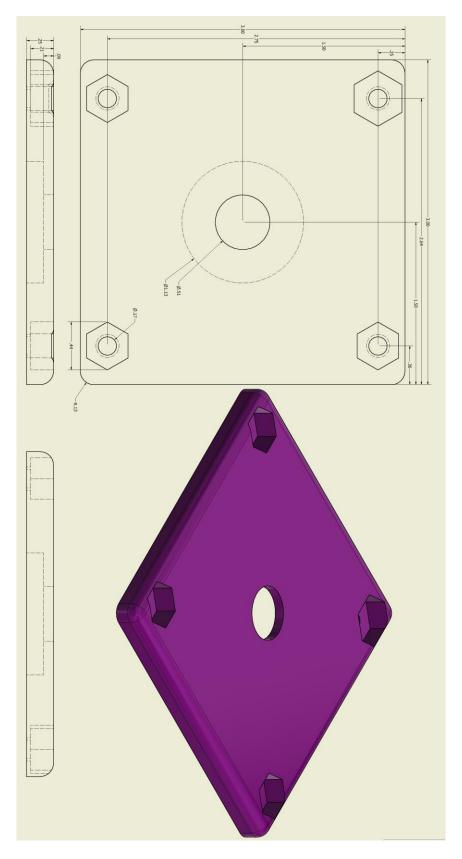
Base Bearing Cover Upper Half Mechanical Drawing (Units: in)
